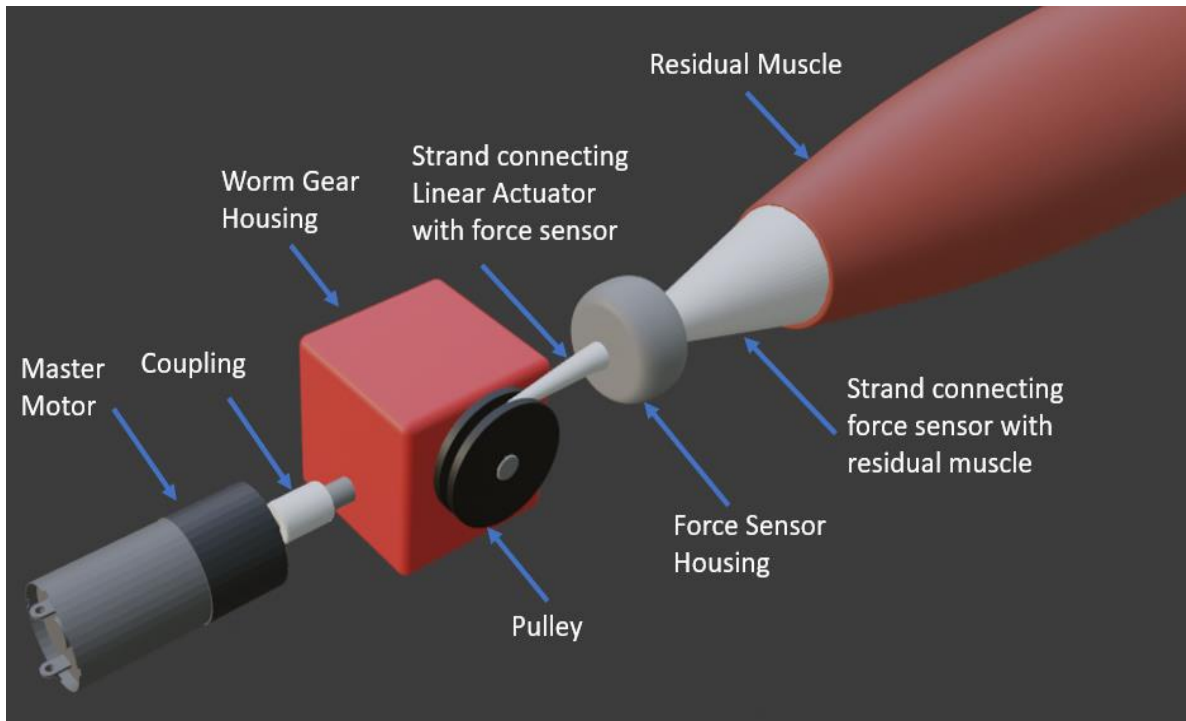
Initial conceptual design of a worm gear mechanism made in Blender (based on the miniature worm gear reducers of ondrives.us [20]).
